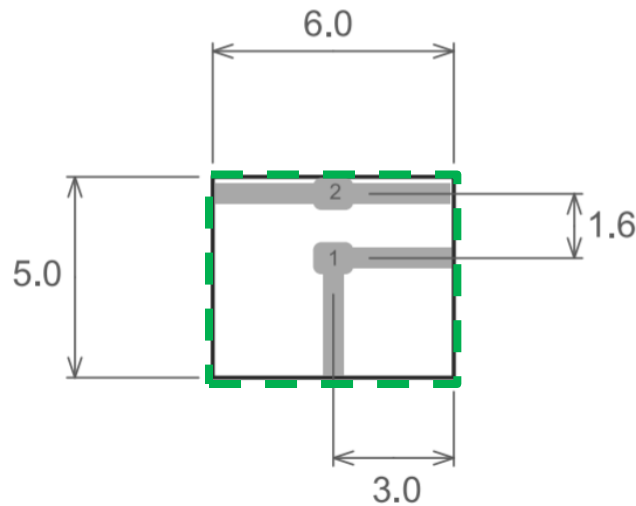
Footprint of the AC10248-01 on the top PCB layer. The two soldering pads are marked by the digits “1” and “2”.
